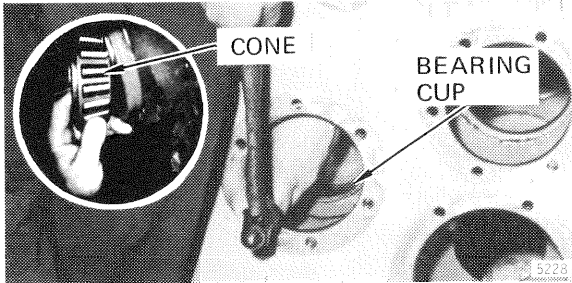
INSTALLATION OF DRUM AND DRUM SHAFT (Sheet 4 of 4)
